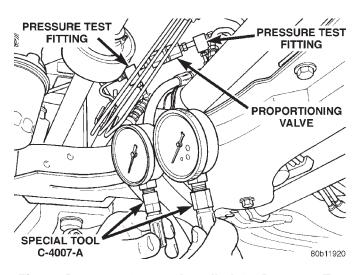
Pressure Gauges Installed On Pressure Test Fittings
